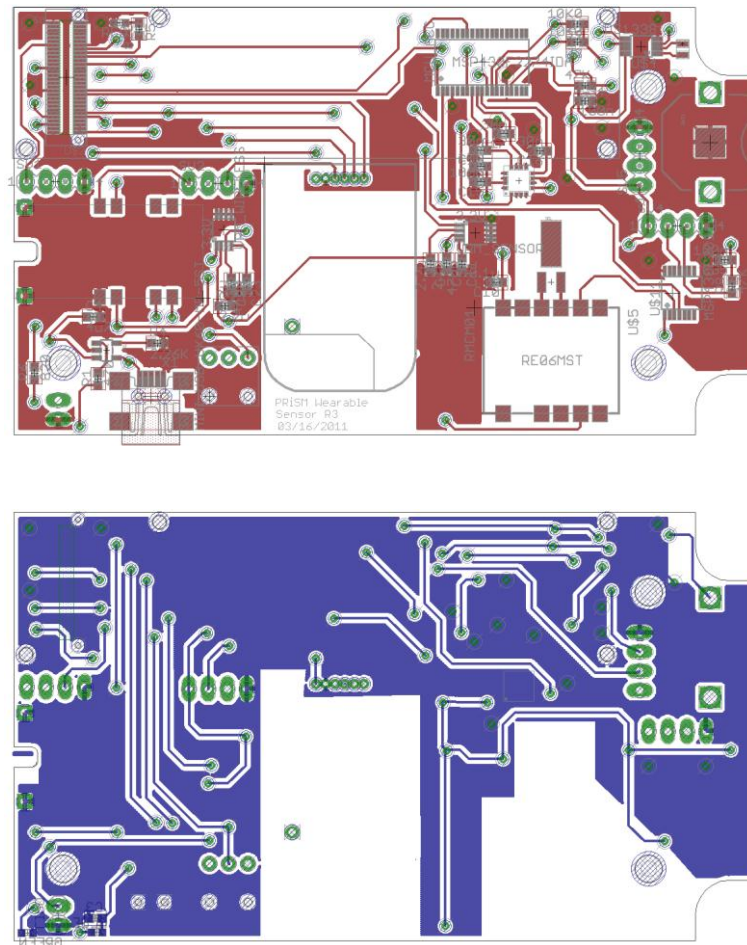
Top and bottom layers of the designed PCB on No-Bluetooth prototype in real size.
